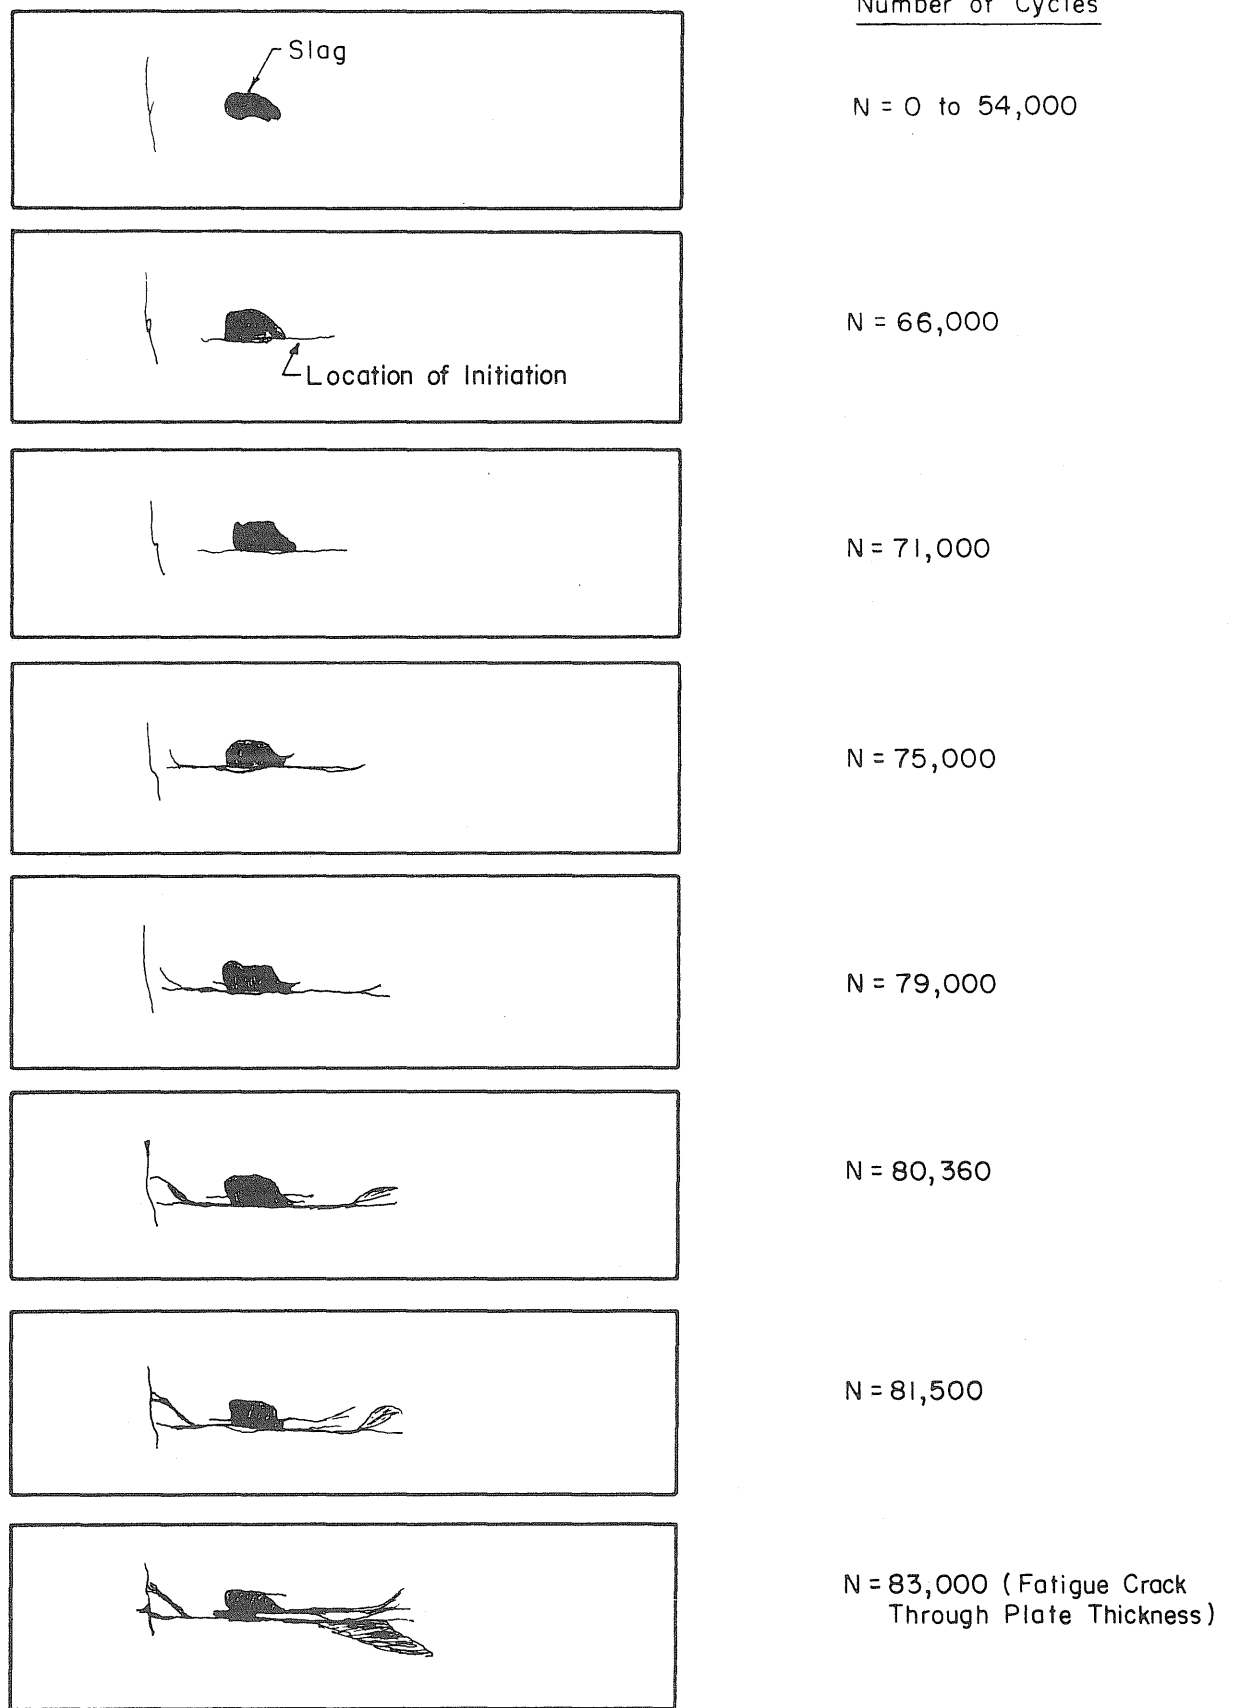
TRACINGS OF RADIOGRAPHS TAKEN DURING FATIGUE TEST OF SPECIMEN ND-18
